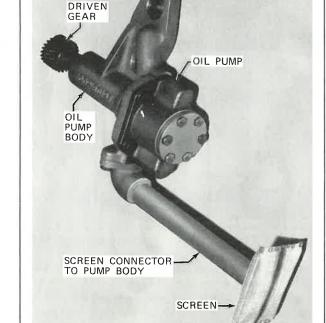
NEW GEAR TYPE LUBE PUMP (STARTING WITH WBG-9510 AND WBO-9516).
